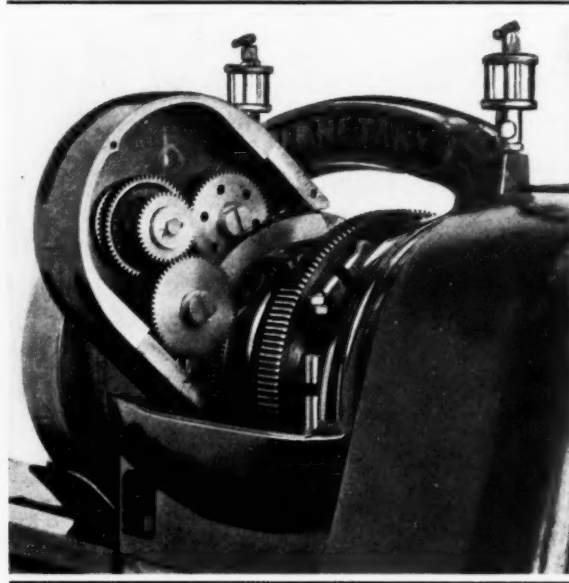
The Attachment in which Gears are Changed to Obtain Any Thread Pitches
